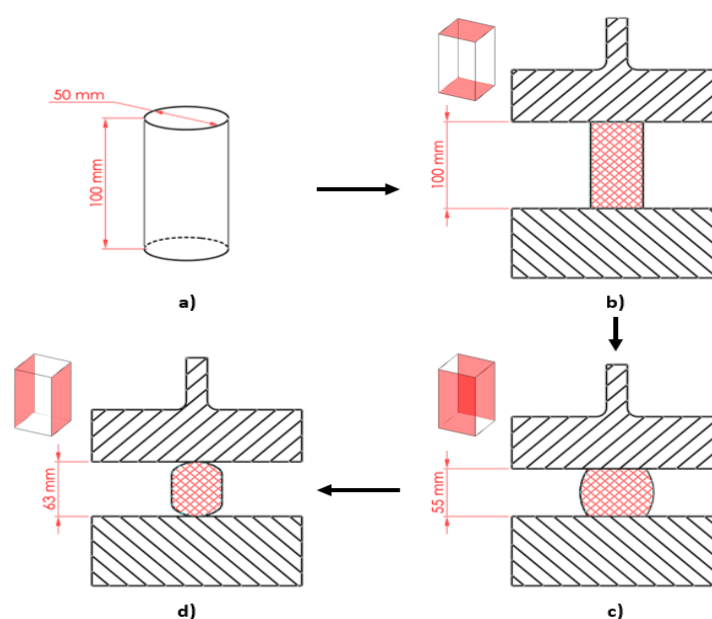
Schematic forging steps: a) initial dimensions of the samples, b) – d) forging in different axes.
